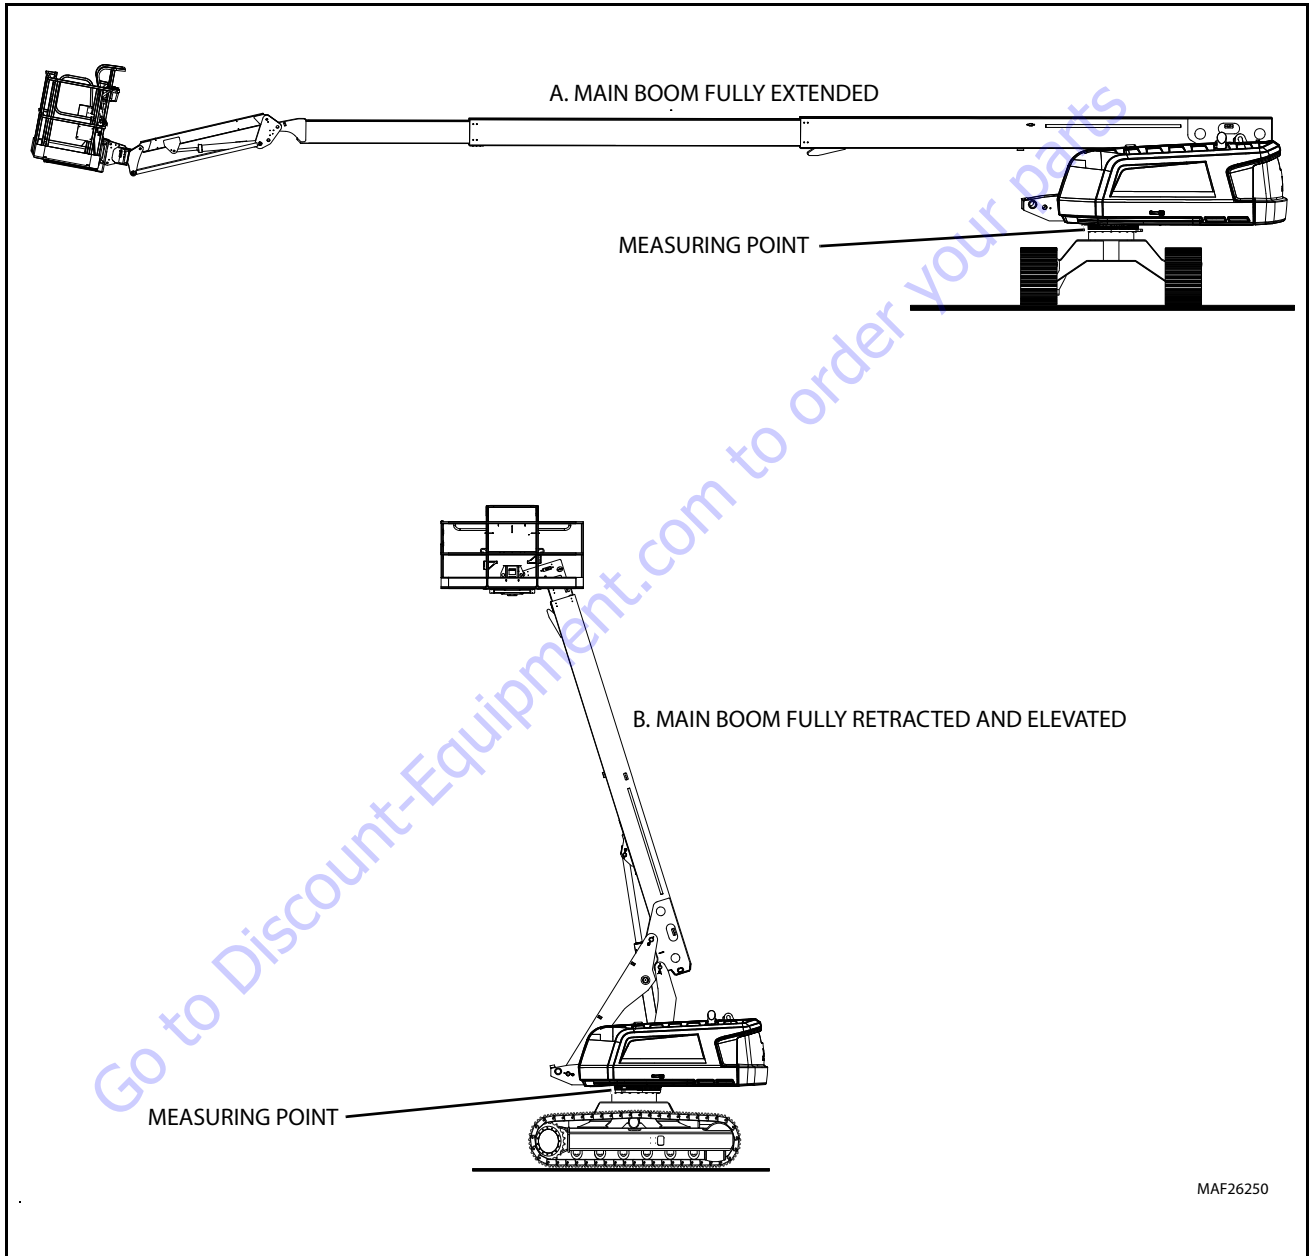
Swing Bearing Tolerance Measurement Location & Boom Placement
